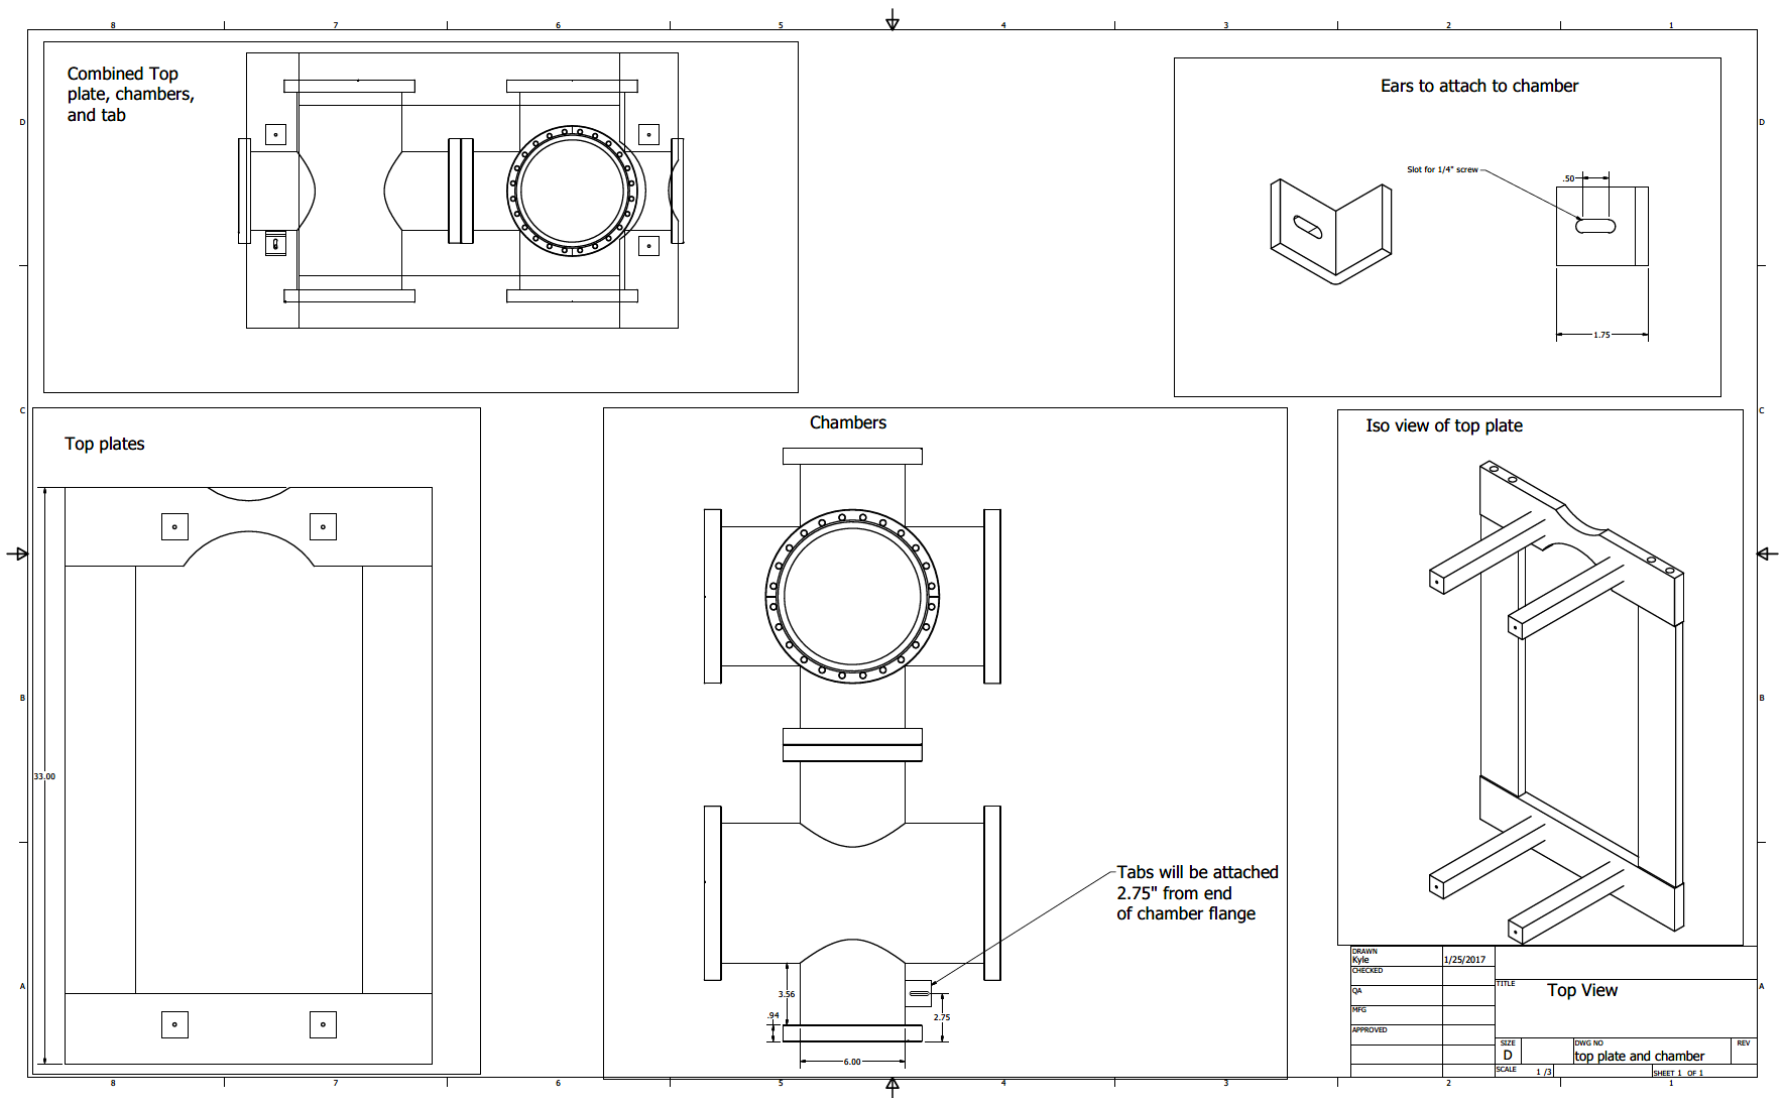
Drawing showing the connections from the adjustable plates, to the aluminum pillars, to the steel tabs, to the chambers.
